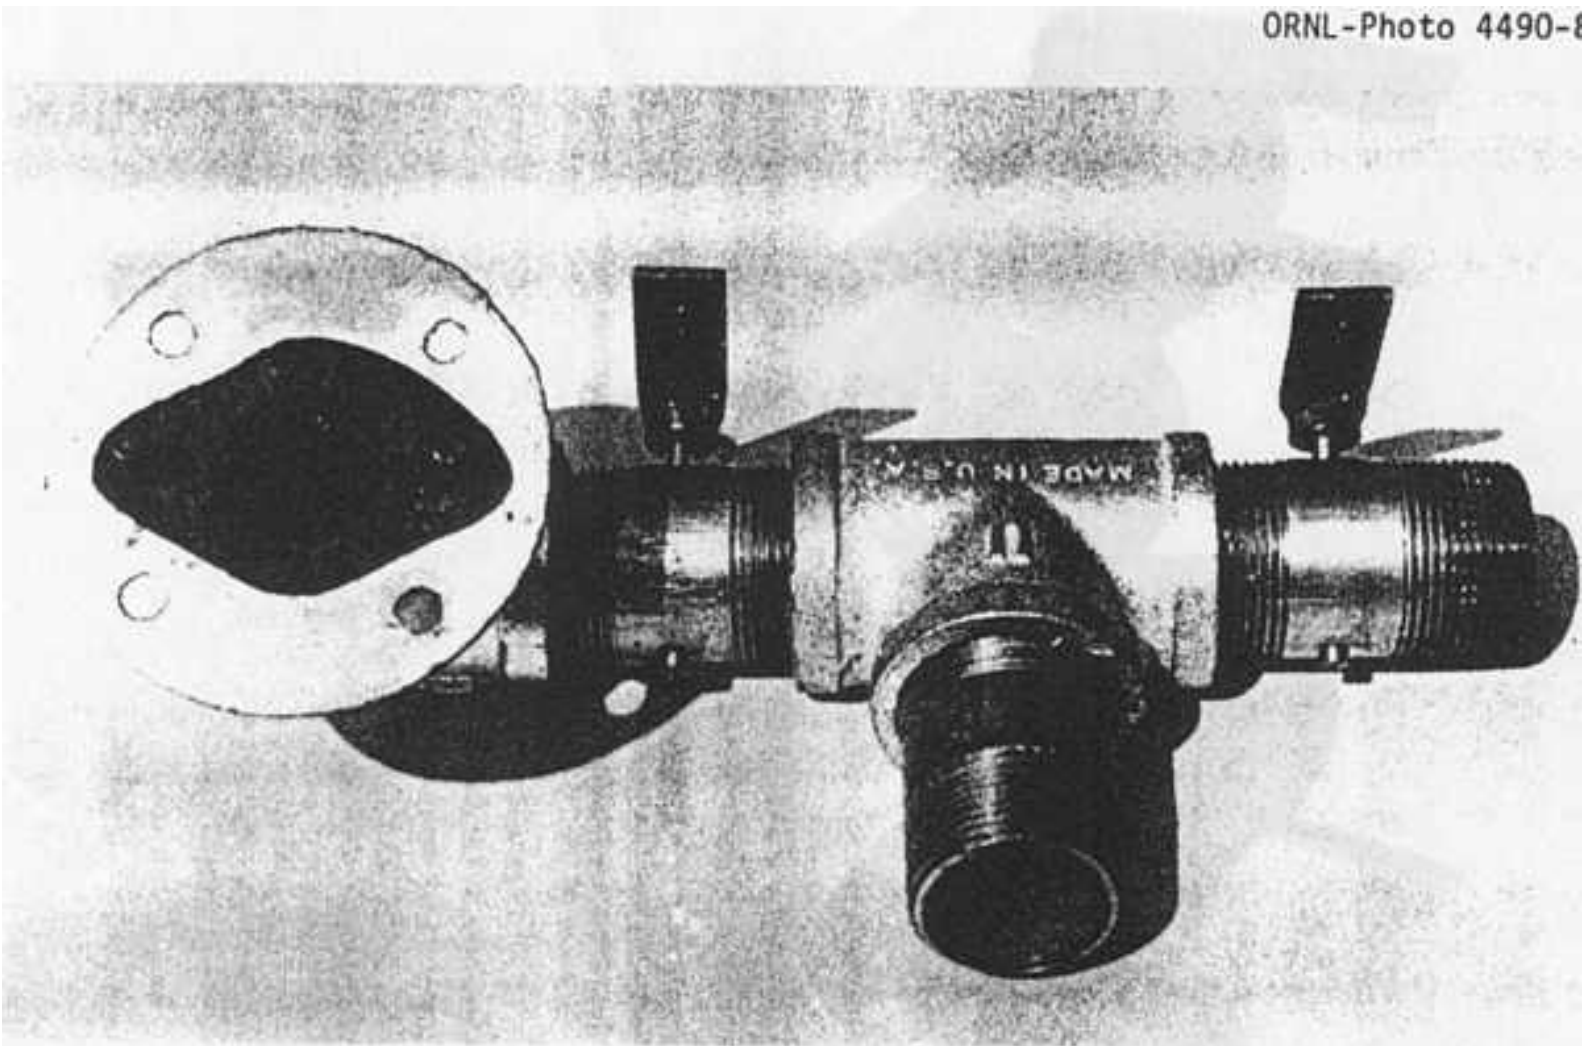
Assembled carburetion unit. Note the gasket on the closet flange.
